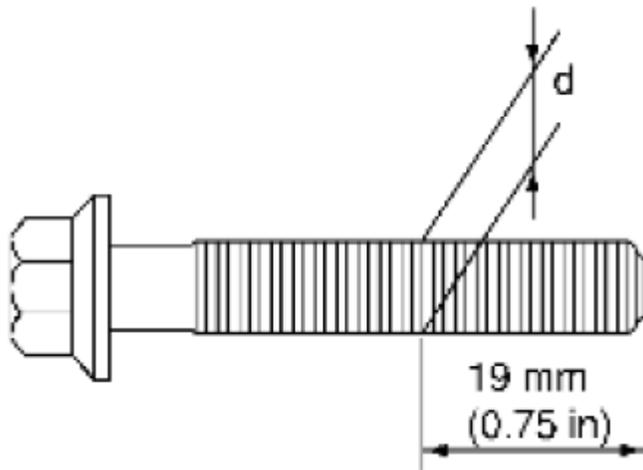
Identifying Connecting Rod Bolt Outer Diameter
